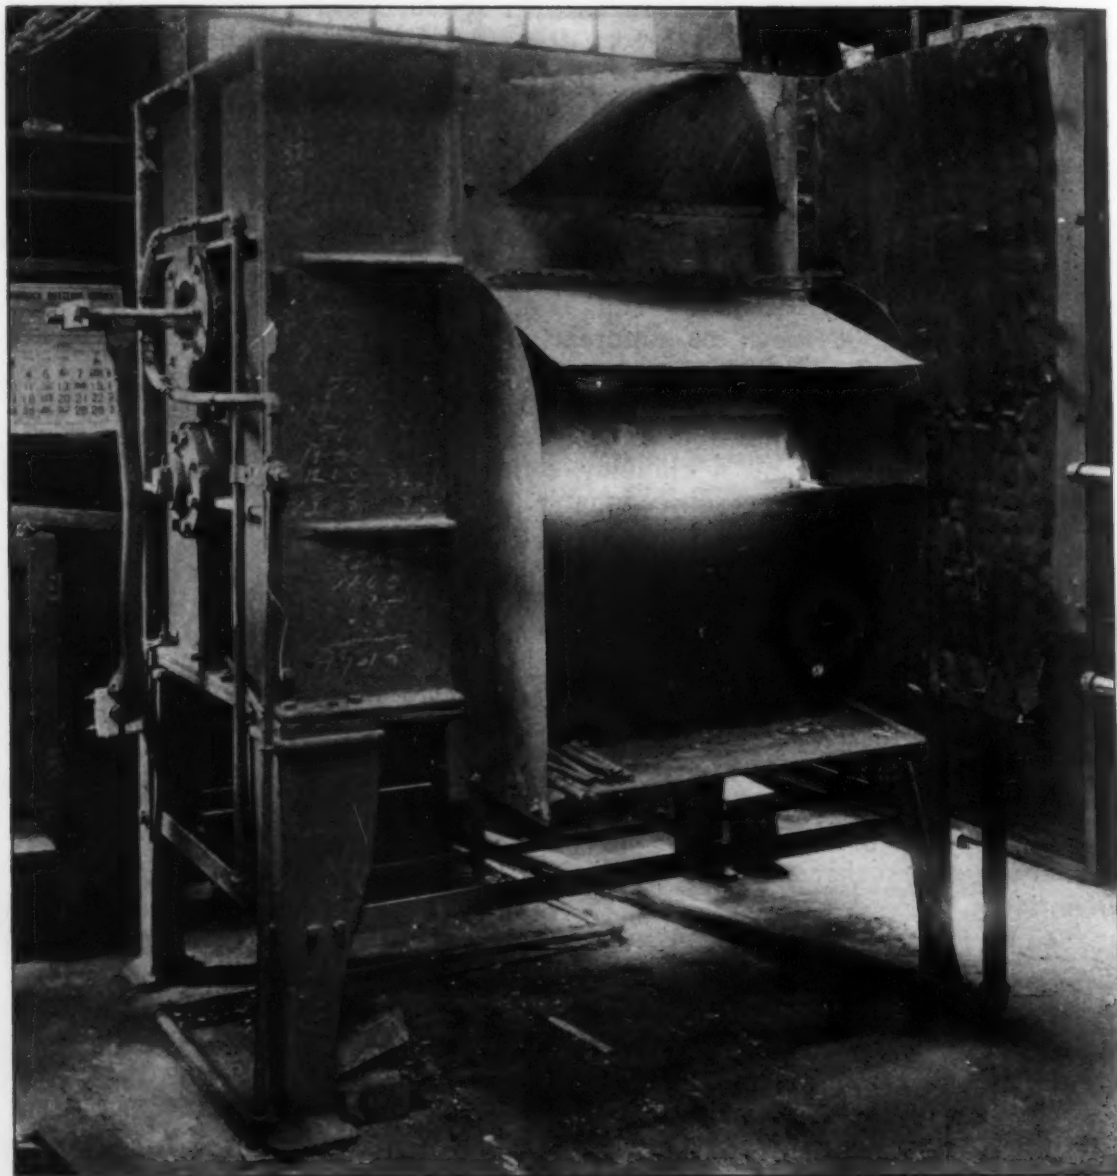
FRONT VIEW OF RESISTANCE TYPE ELECTRIC FORGING AND HEAT TREATING FURNACE
